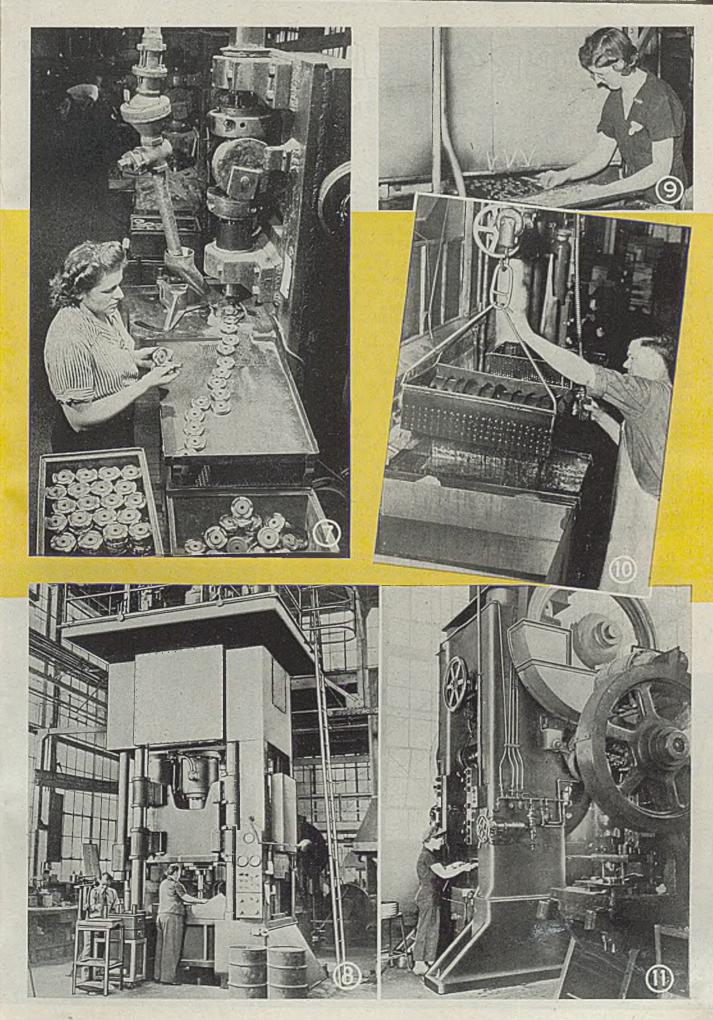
Sintered parts are sized in huge presses. Size tolerance can be within 5/10,000-inch, thus attaining great dimensional accuracy
